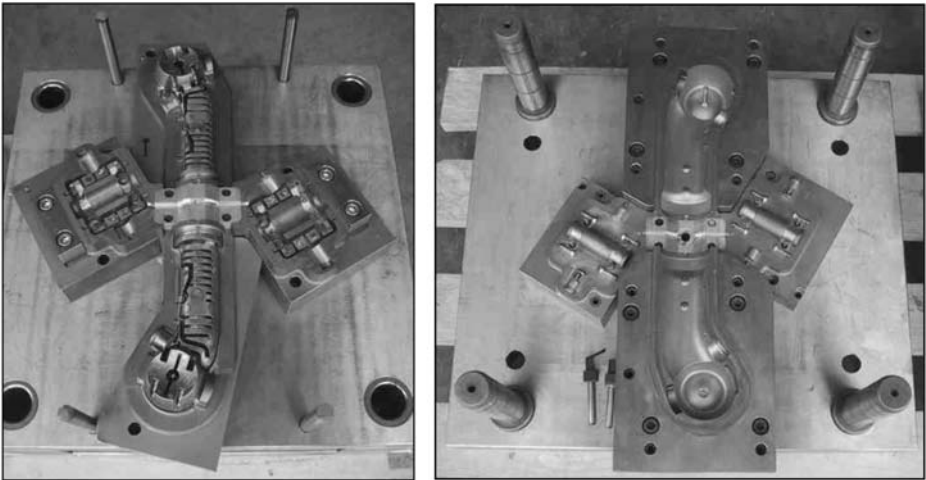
One of the injection moulds containing eight laser-sintered tool "onserts"
